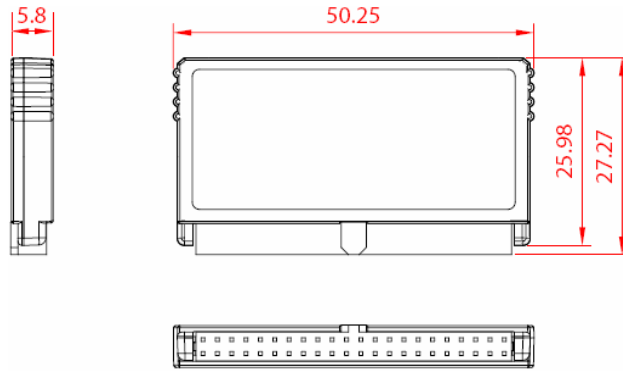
Mechanical Dimension of EDC4000 44-pin (Horizontal Female Type A)
